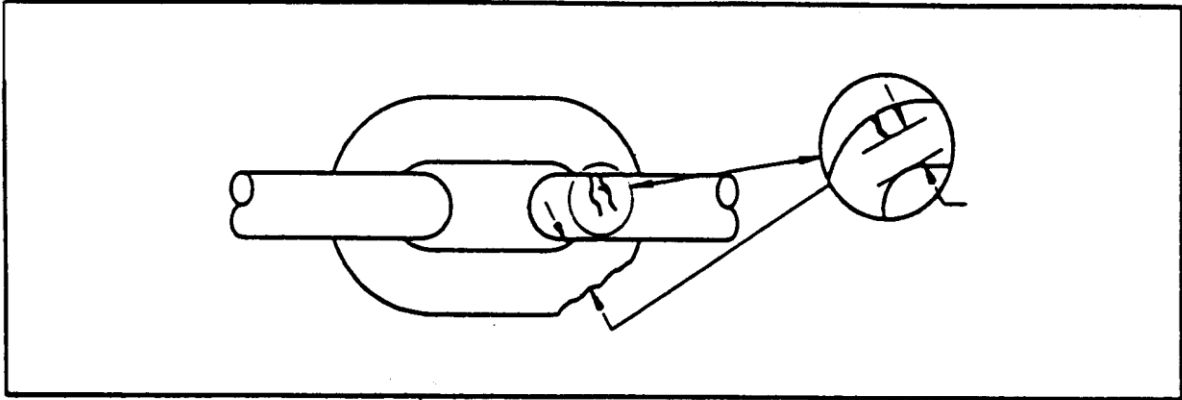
Inspect All Links for Wear at the Bearing Surfaces
